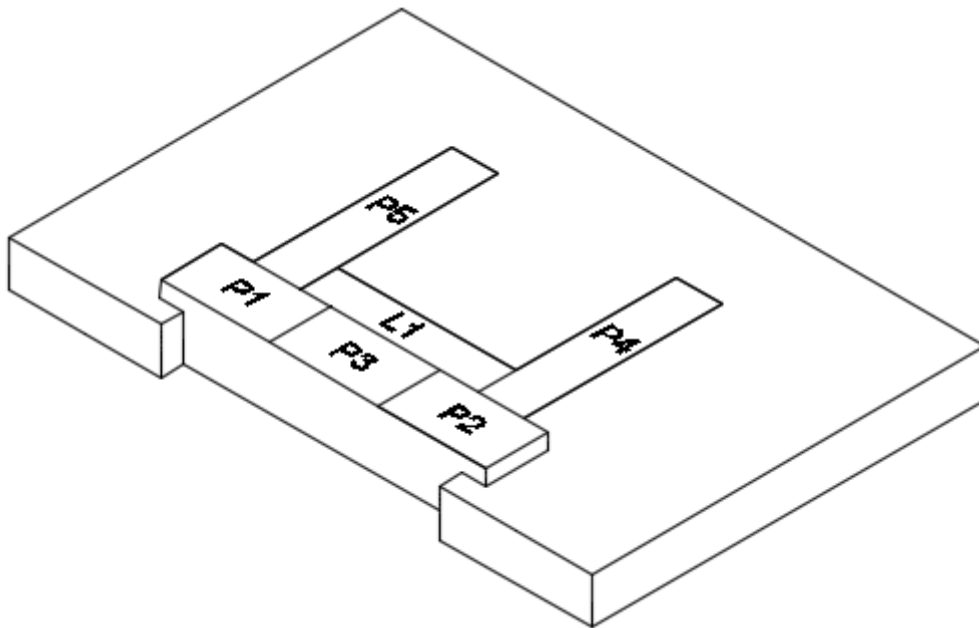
Mold model to align the holes P5-P1 and P4-P2
